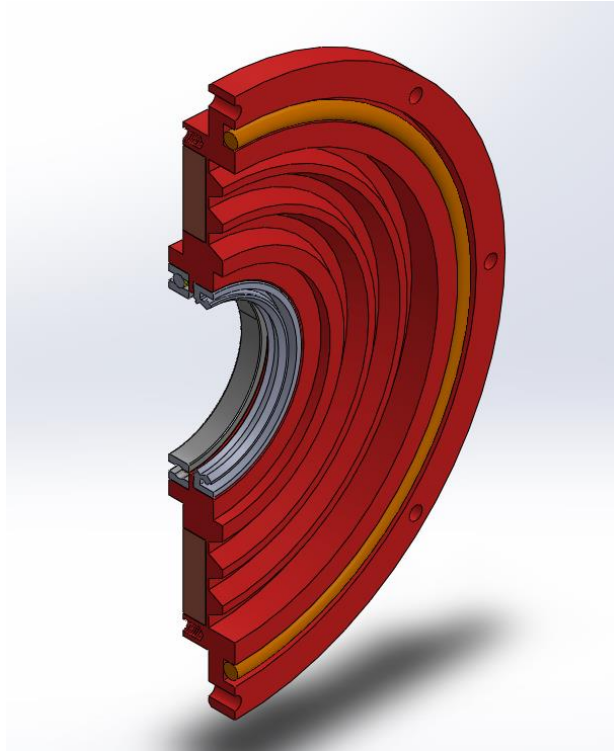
Section view of inner housing when installing Slip seal, O-ring, bearing and coil
